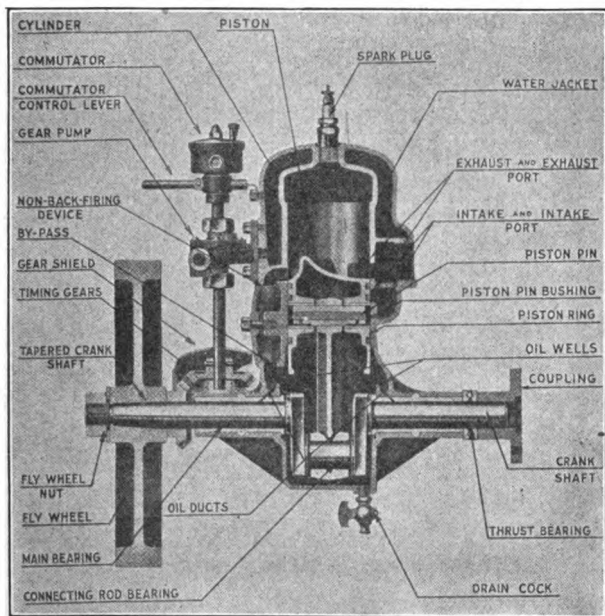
Part Sectional View Showing Arrangement of Parts in Gray Marine Motor, Model U.
